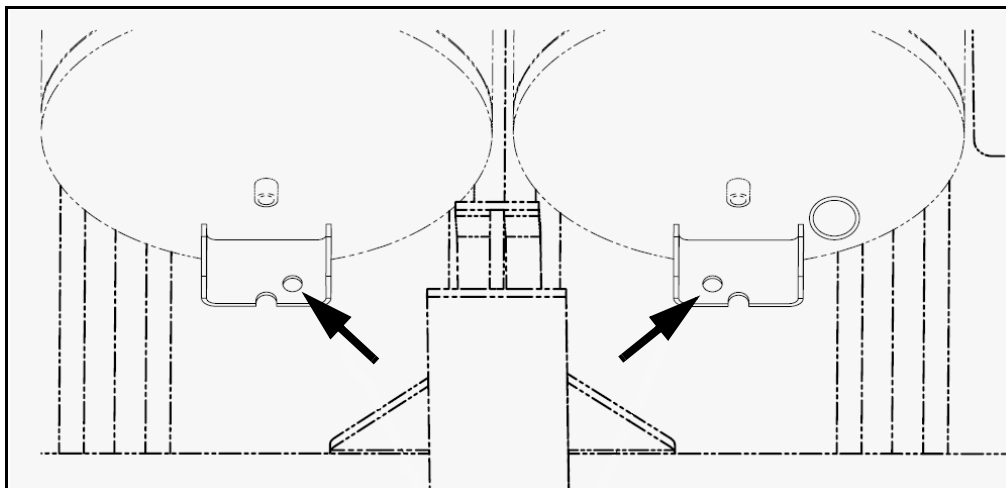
New drilled holes in the inboard section of the air tanks lower brackets.
